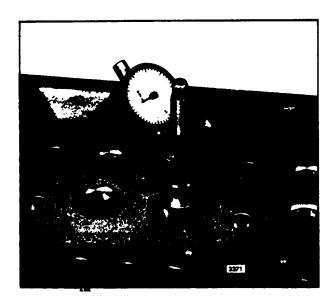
Checking Relative Concentricity of Valve Seat Insert with Relation to Valve Guide
